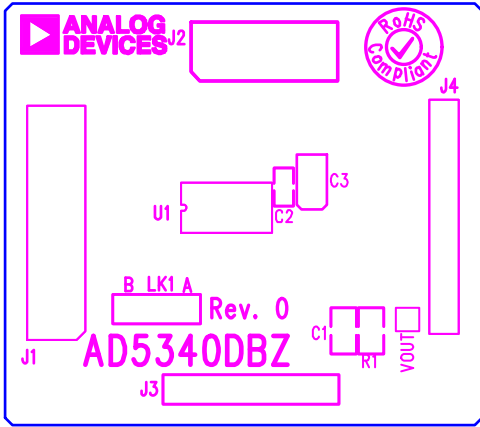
EVAL-AD5340DBZ Daughter Board Component Placement
